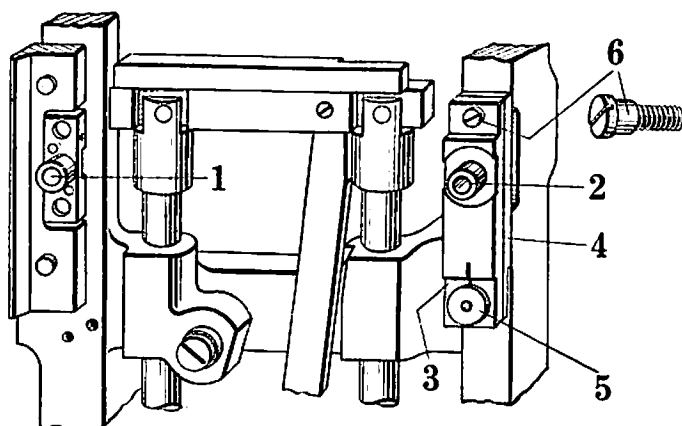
Showing the mold disk locking stud bushings 1 and 2, which hold the mold disk in position when it is forward at casting and ejecting position. The right-hand bushing 1 is mounted on a single fixed block. The left-hand or floating stud block consists of two plates 3 and 4 joined at the bottom by a hinge stud 5. The upper end of plate 3 can move slightly from side to side as permitted by the shoulder on screw 6.
